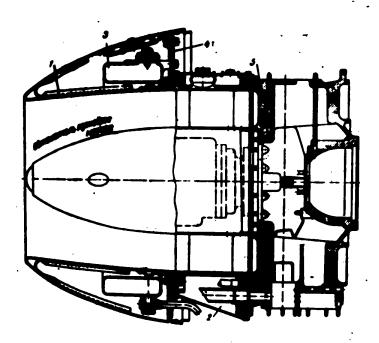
Axial Flow Compressor Engine Air Inlet Assembly
